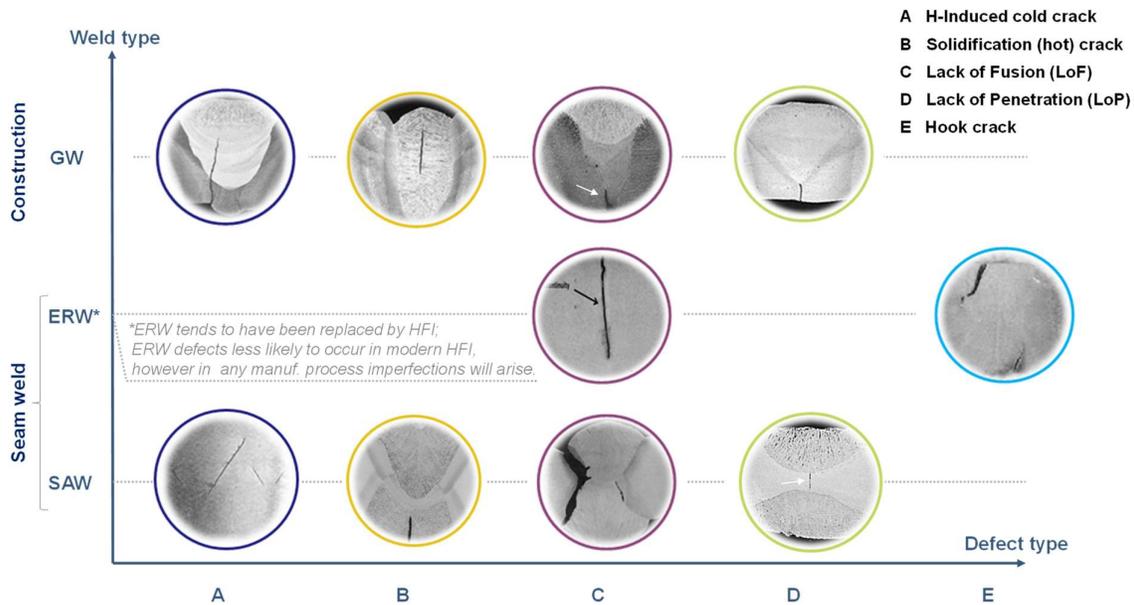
Typical welding defects introduced during linepipe manufacture and construction
